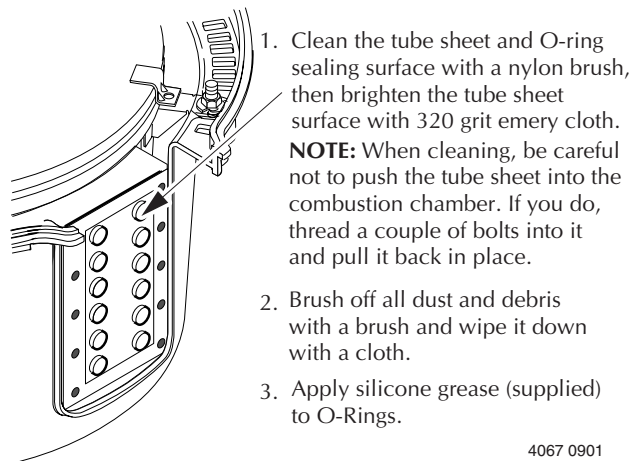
Clean the Tube Sheet and O-Ring sealing surfaces thoroughly as described above.
